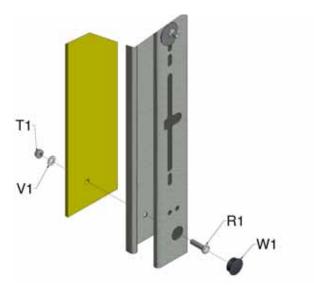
, Bolting of Guide Rail and Joining of Guide Rail to Wall
